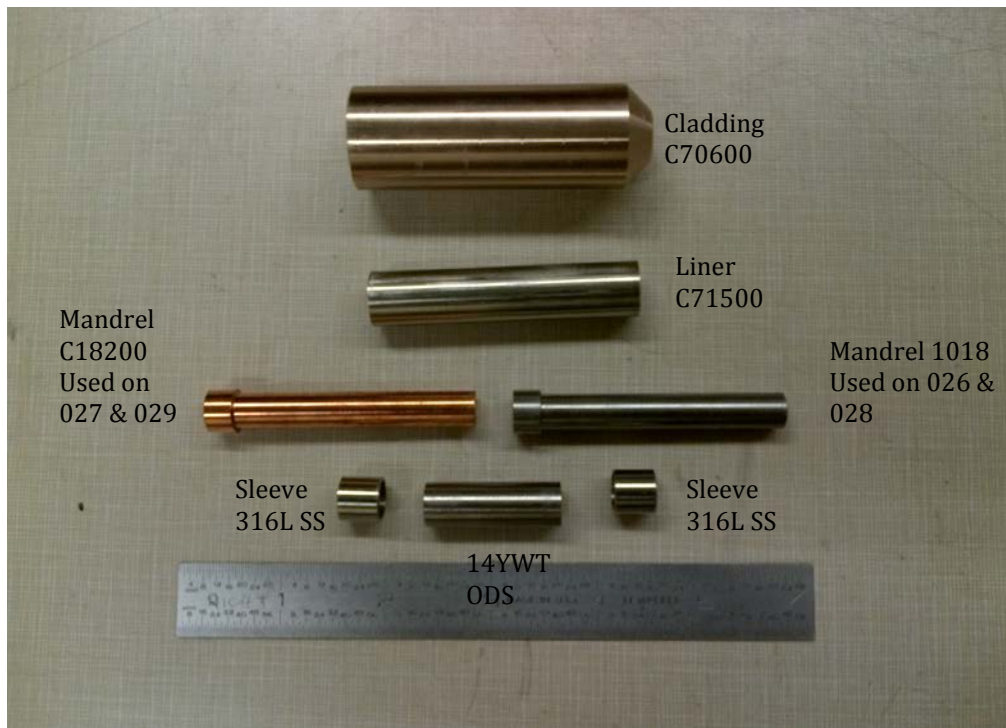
Photo showing billet design for hydrostatic extrusion on 14YWT.
